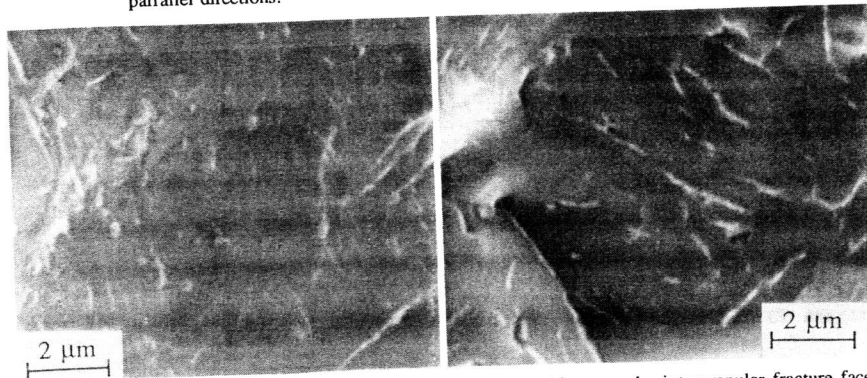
High magnification views of the surface markings on the intergranular fracture facets on (a) 4340 and (b) 3.5NiCrMoV.
